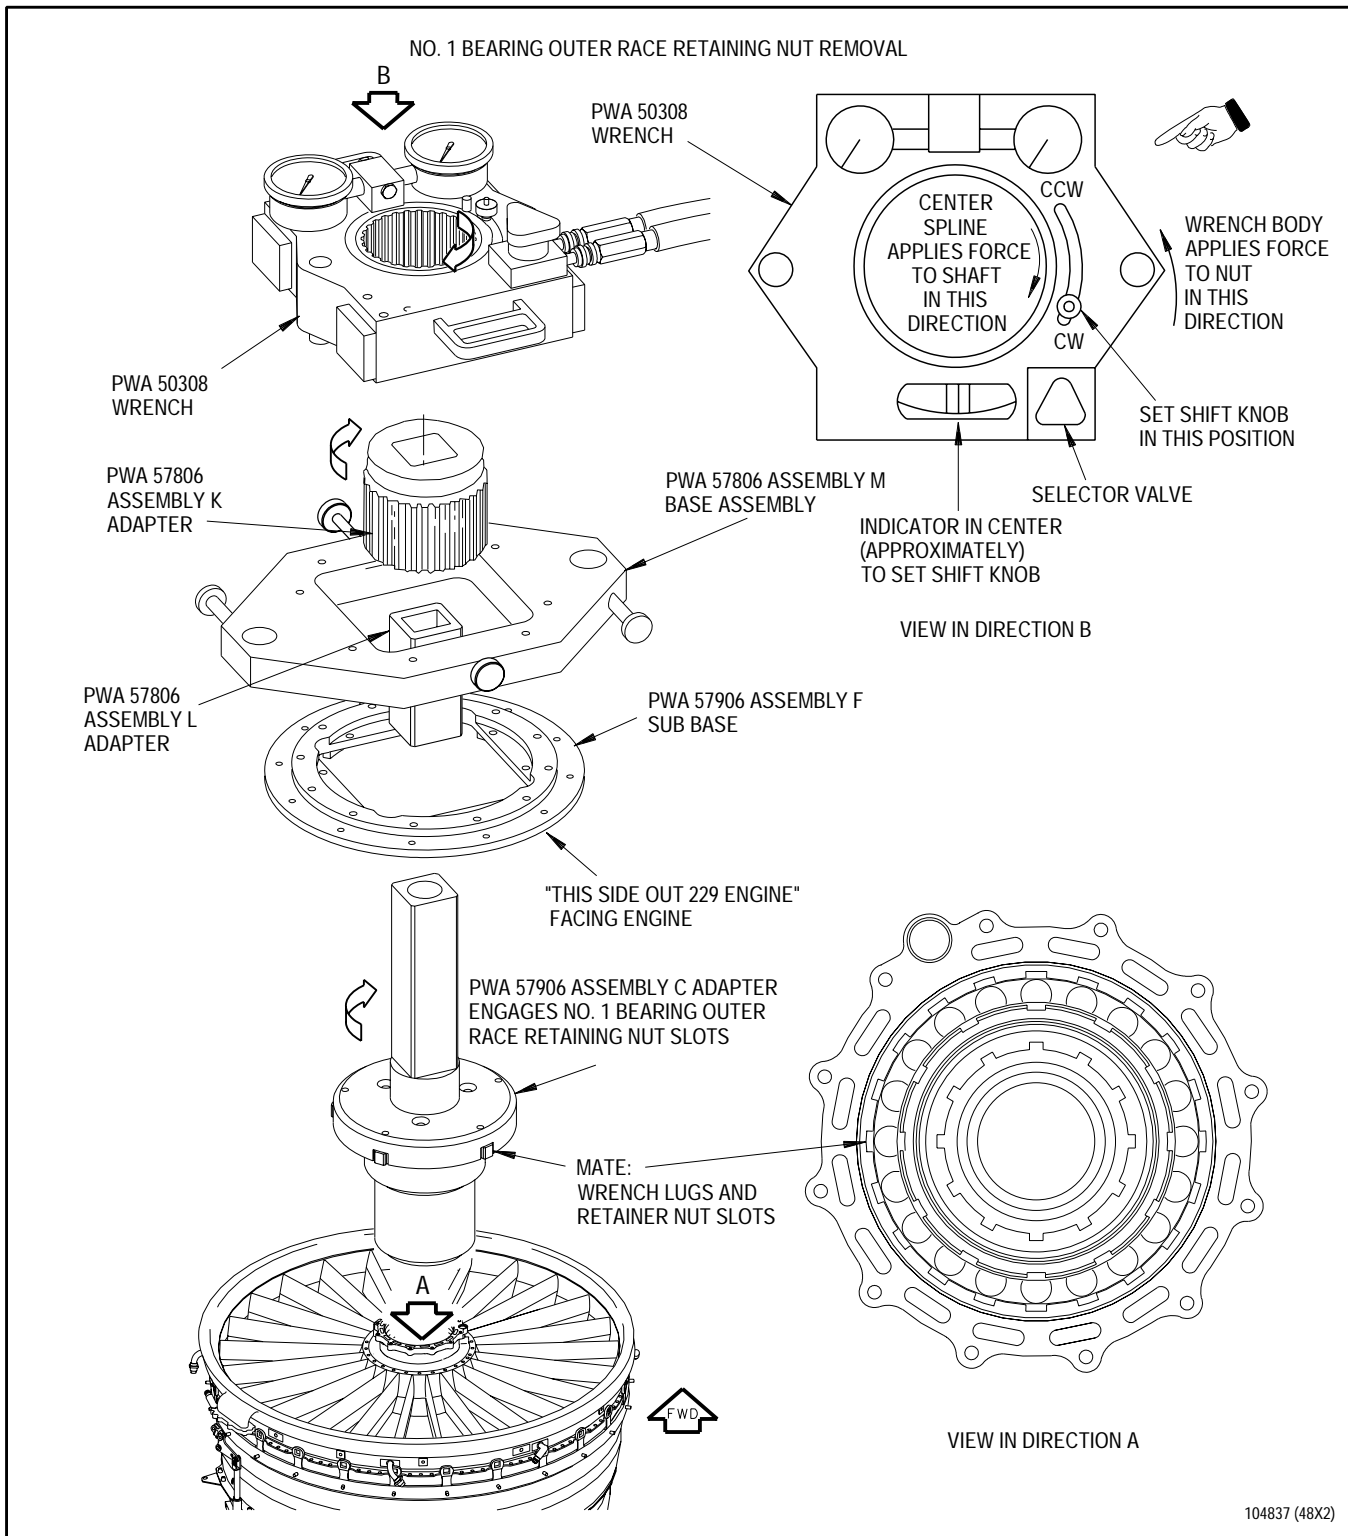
B. No. 1 Bearing Inner And Outer Race Retaining Nuts - Removal (Sheet 2 of 2)
